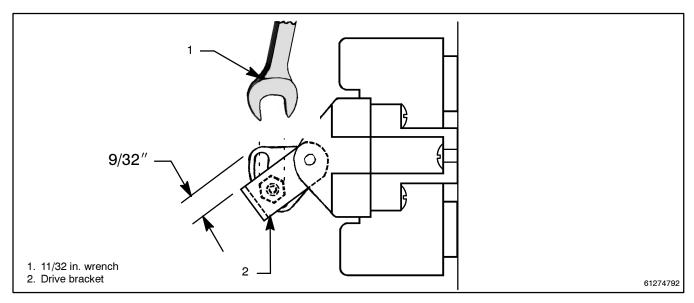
Adjusting TS Control Contacts 71–72 and 9–8. View from right side of TS control contact assembly. Main transfer switch contacts must be closed on emergency side.
